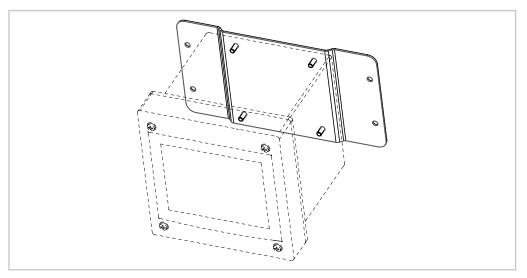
Wall mounting with wall mounting kit – stainless steel version (PC housing)
